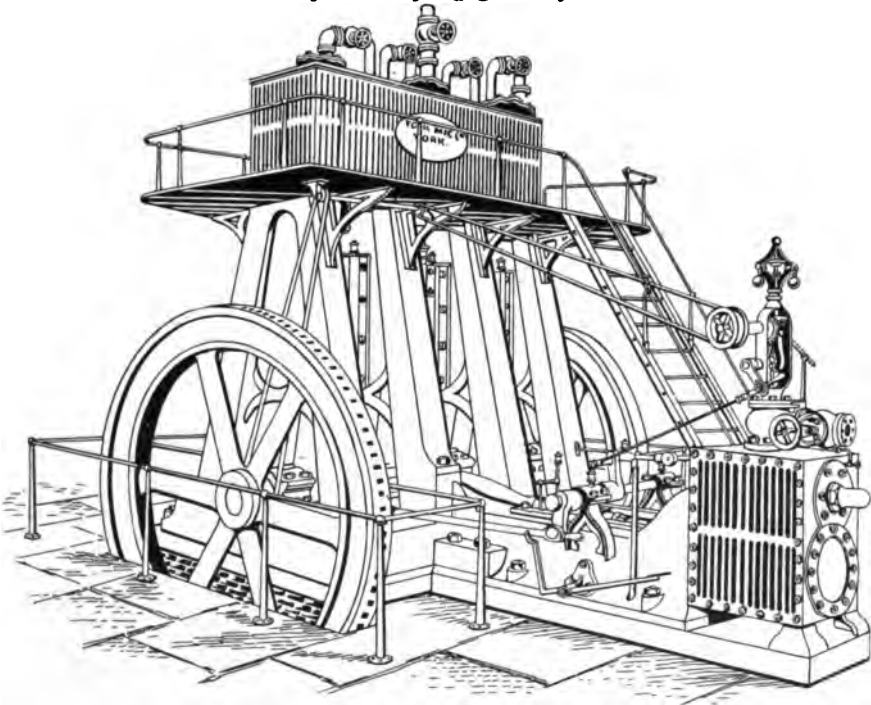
YORK CO.'S COMPOUND COMPRESSOR AND ENGINE.
